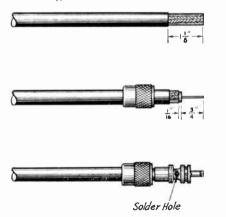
Dimensions for stripping ½-inch cable to fit Amphenol Type 83-1SP plug.
